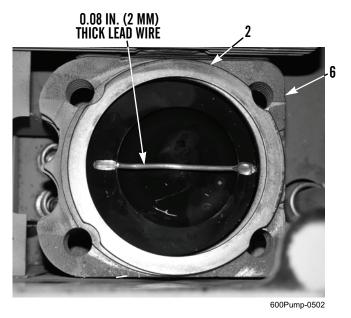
Removing Cylinder Head Gasket and Lead Wire.
